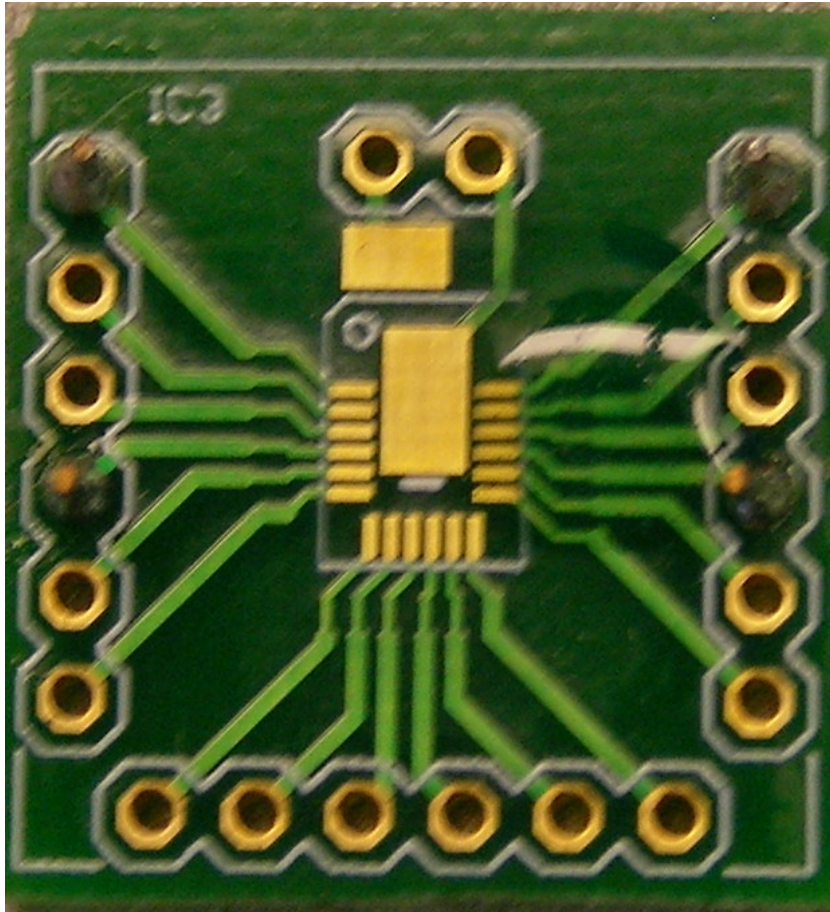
Daughterboard used to measure leakage through PCB and transparent encapsulating epoxy
